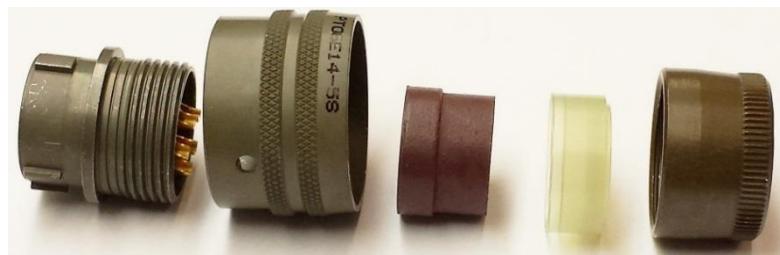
MIL Connector Detailed View (PT06E14-5S)
